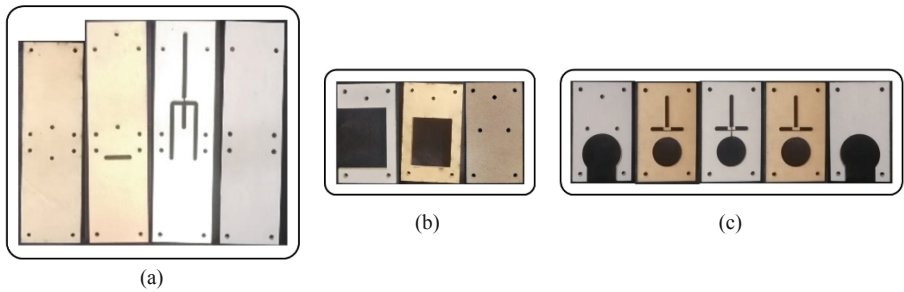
Fabricated layers using laser machining technique (a) Droplet generator; (b) Pump reservoir; (c) Pump chamber.
